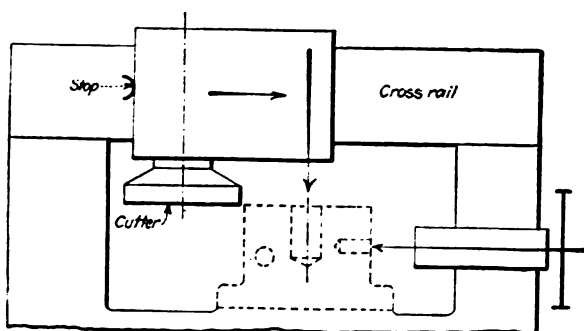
PROGRESS SKETCH OF MACHINE AS OUTLINED
